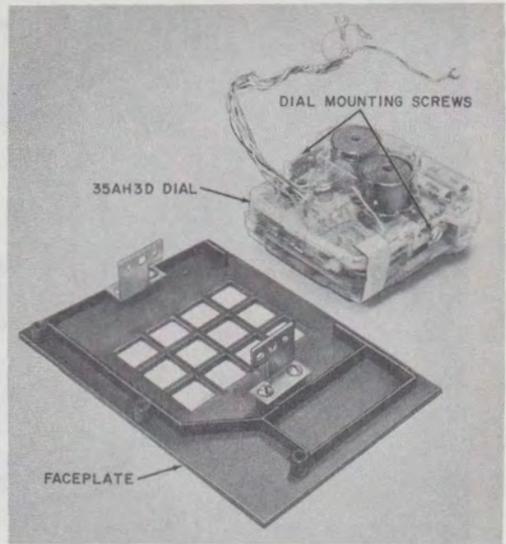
TOUCH-TONE Dial Removed From Faceplate
